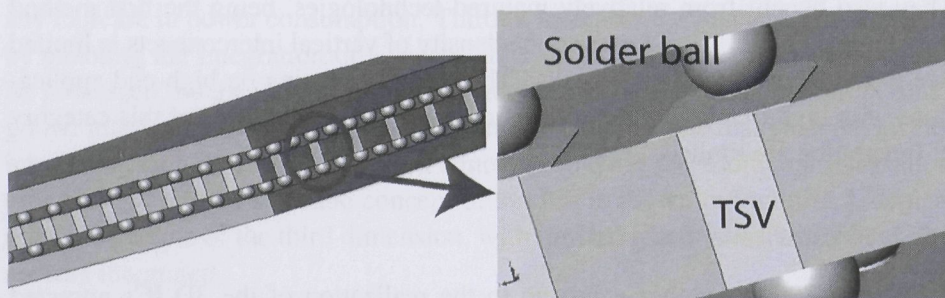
Advanced flip-chip bonding employing TSVs and solder balls. The large size of TSV and solder balls limits interconnect density [27]
